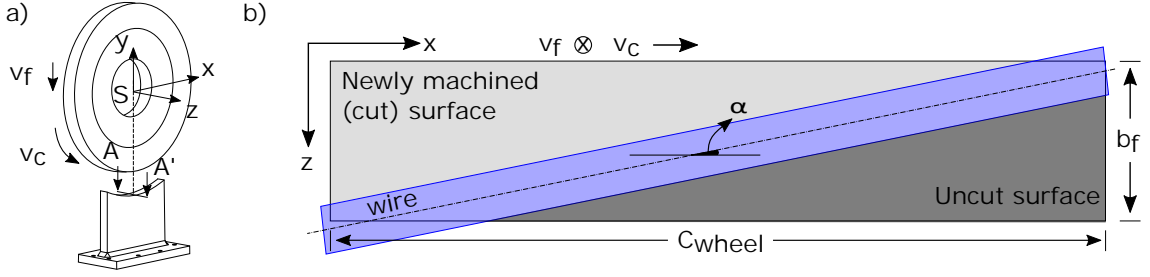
(a) Position of the wheel and silicon workpiece and line  $A - A'$ . (b) Position of wrapped wires and cut-uncut surfaces.
